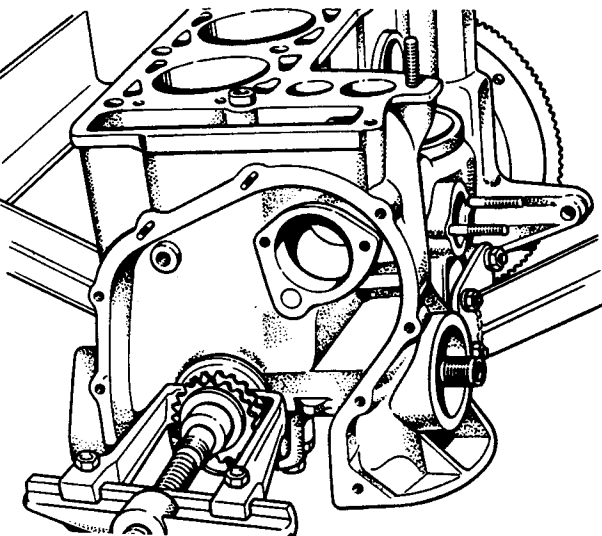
Removing Crankshaft Sprocket with General-Purpose Remover Tool A.40005/1/7
